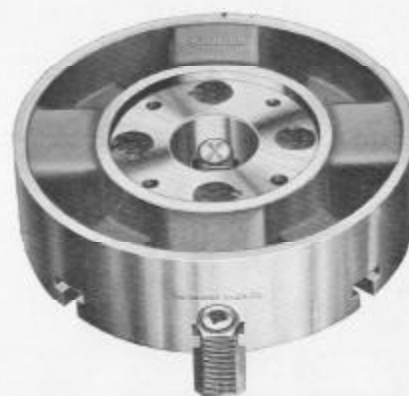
shows a cast iron semi-machined chuck plate; semi-machined because it has been bored, faced, and threaded to fit the spindle nose of various sizes of South Bend Lathes.
